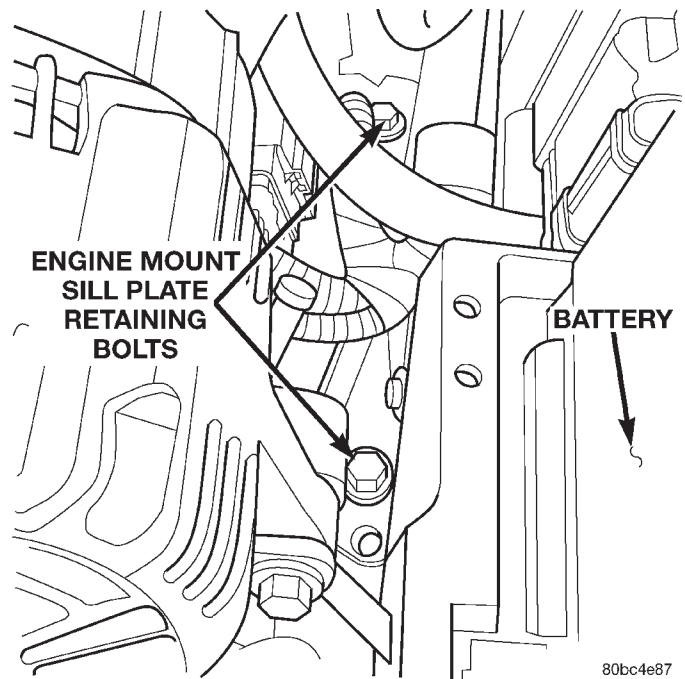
Engine Mount Sill Plate Bolts - Leftside
